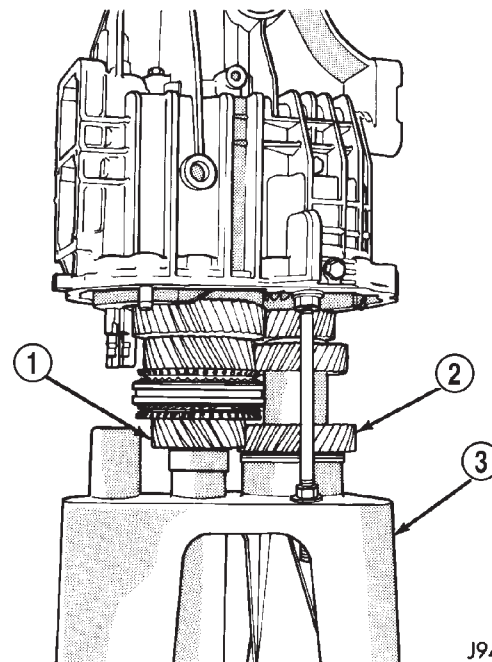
Geartrain And Housing Mounted On Fixture Tool
